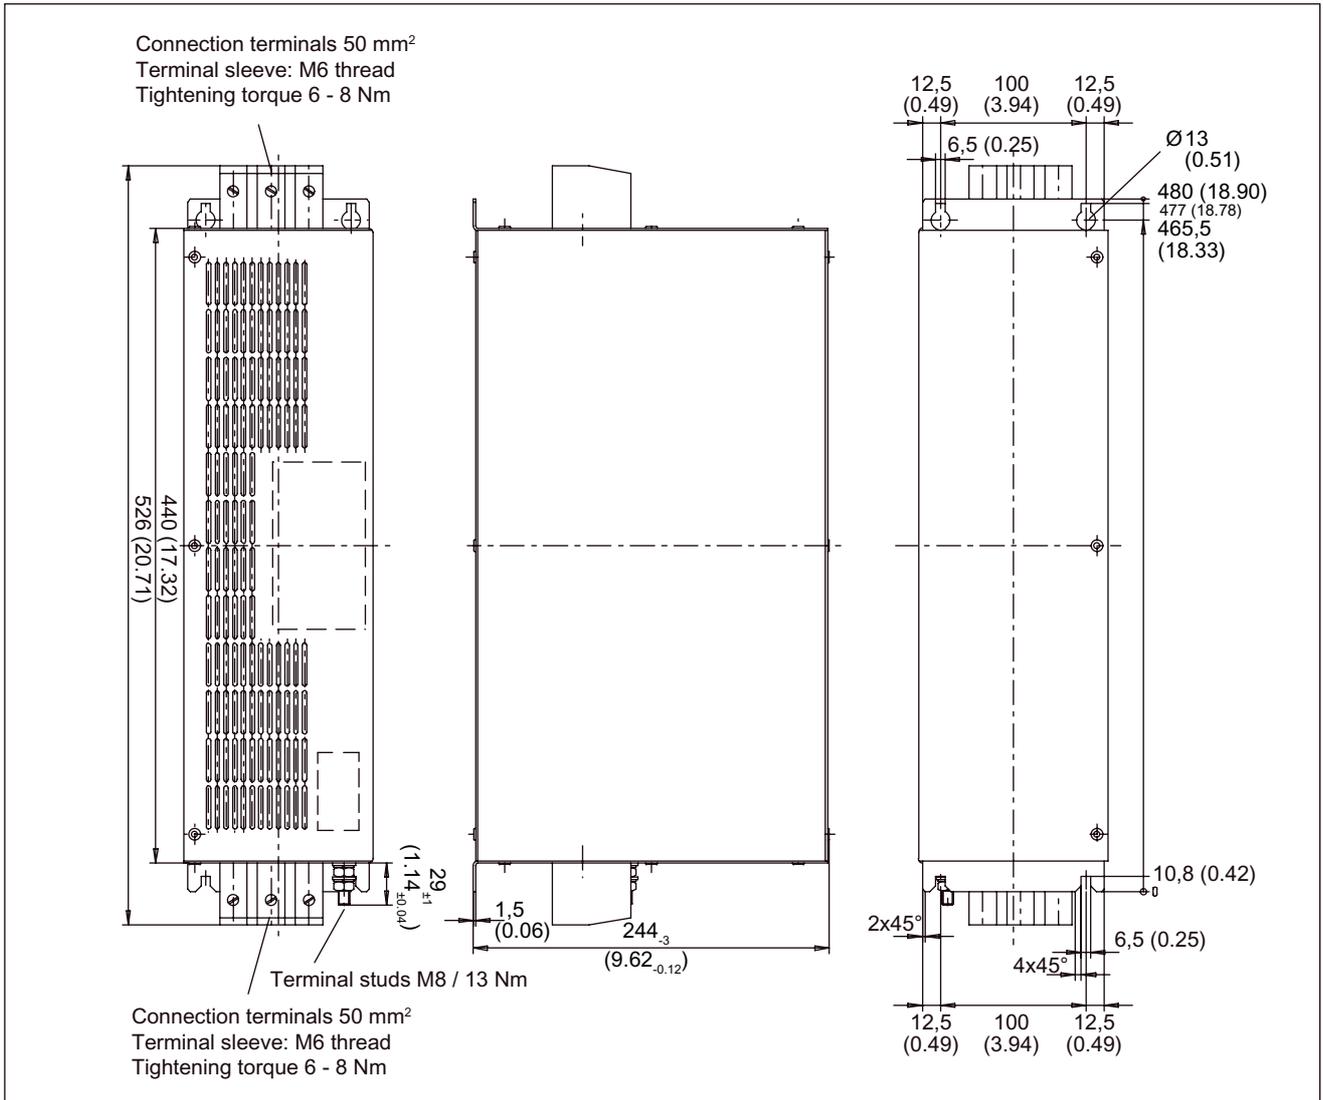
Dimension drawing of Wideband Line Filter 36 kW for Active Lines Modules, all dimensions in mm and (inches)
